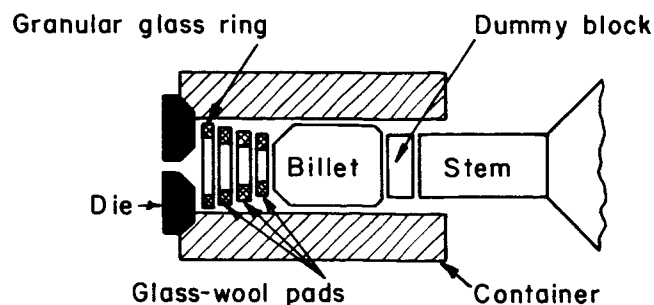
CROSS SECTION OF EXTRUSION PRESS SHOWING TECHNIQUES USED FOR PRODUCING THIN-SECTION SHAPES (REF. 37)
